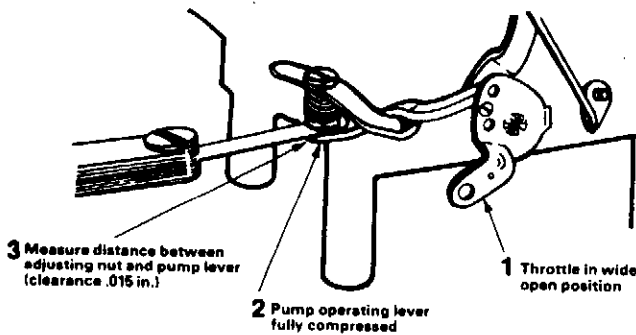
PUMP OVERRIDE ADJUSTMENT
